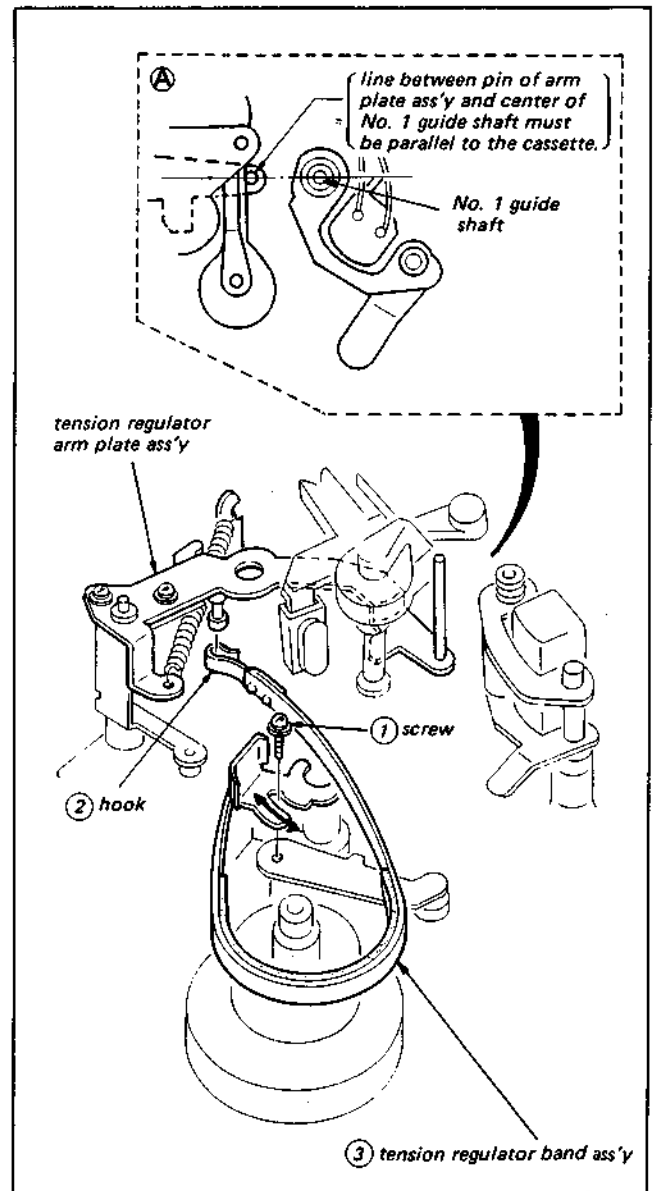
Replacement and adjustment of the tension regulator band assembly
